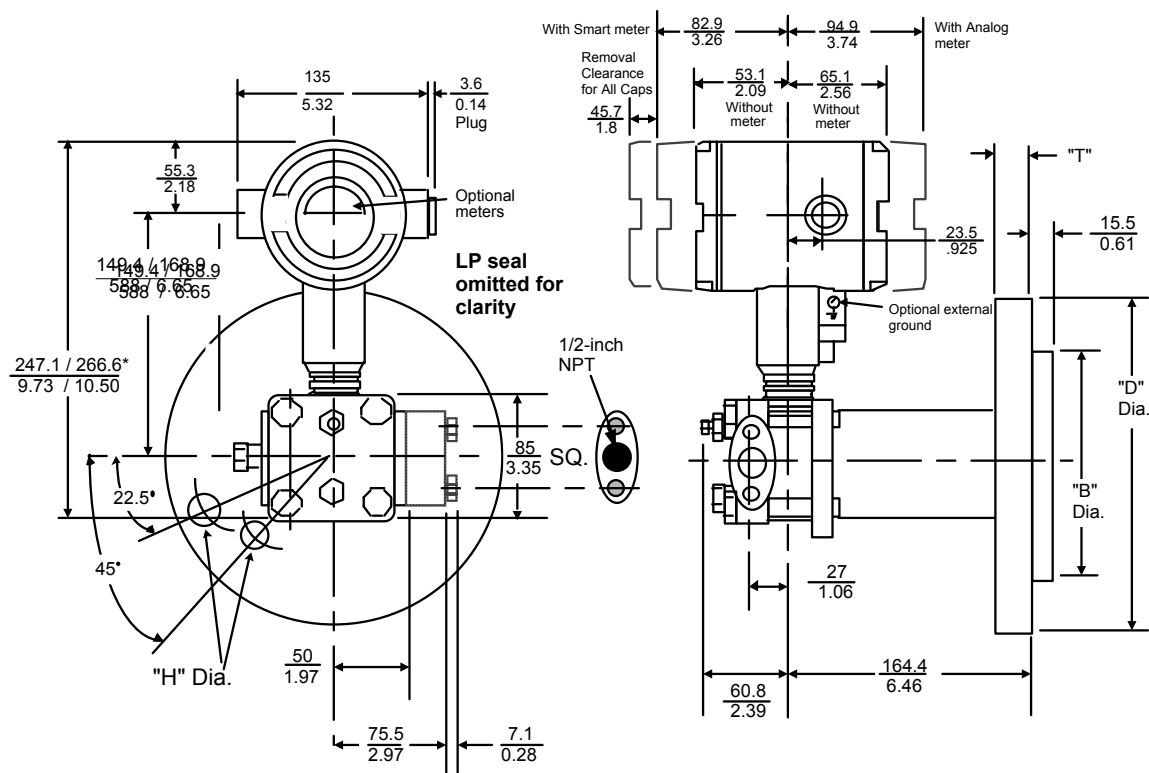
Typical mounting arrangement for flange mounted liquid level transmitter.
